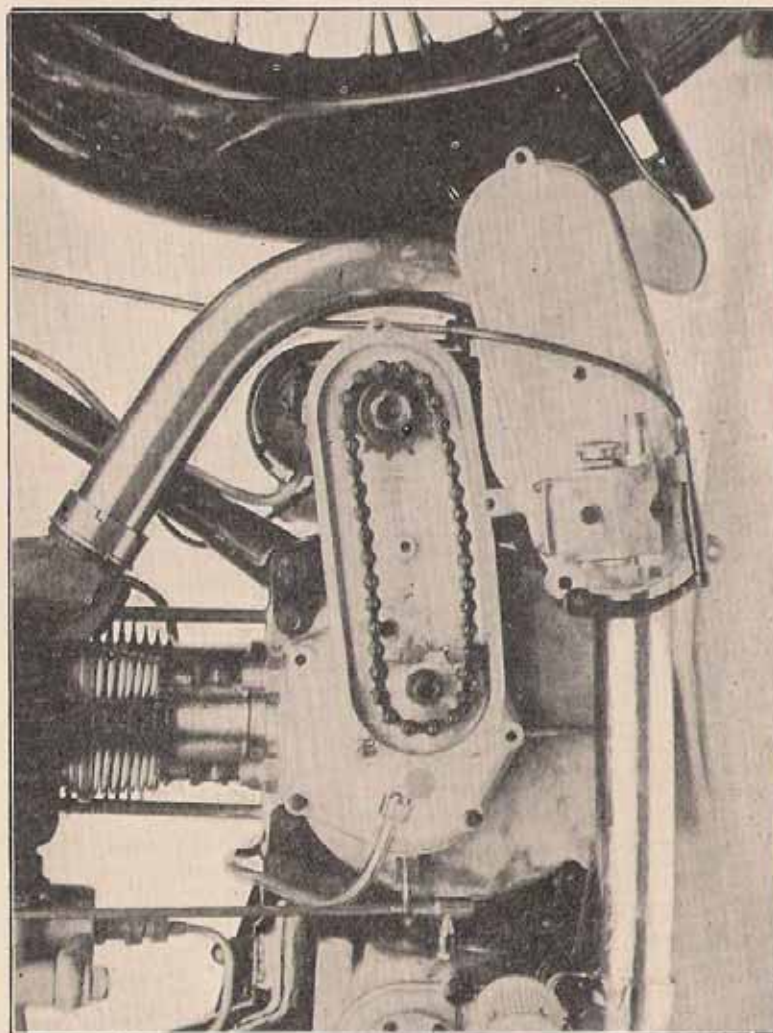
THE 3-49 H.P. MAGNETO DRIVE. CHAIN COVER REMOVED
